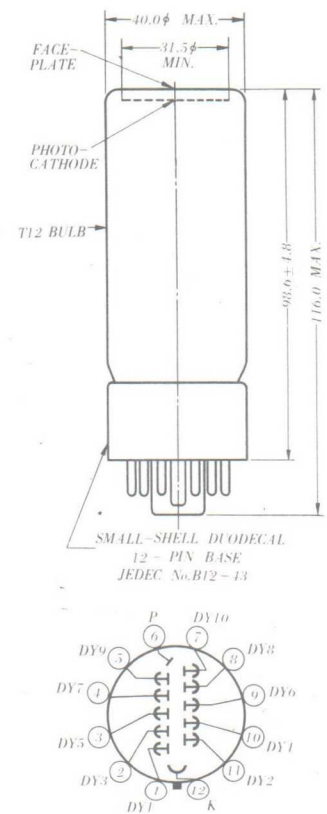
DIMENSIONAL OUTLINE AND BASING DIAGRAM- DIMENSIONS IN MILLIMETER
